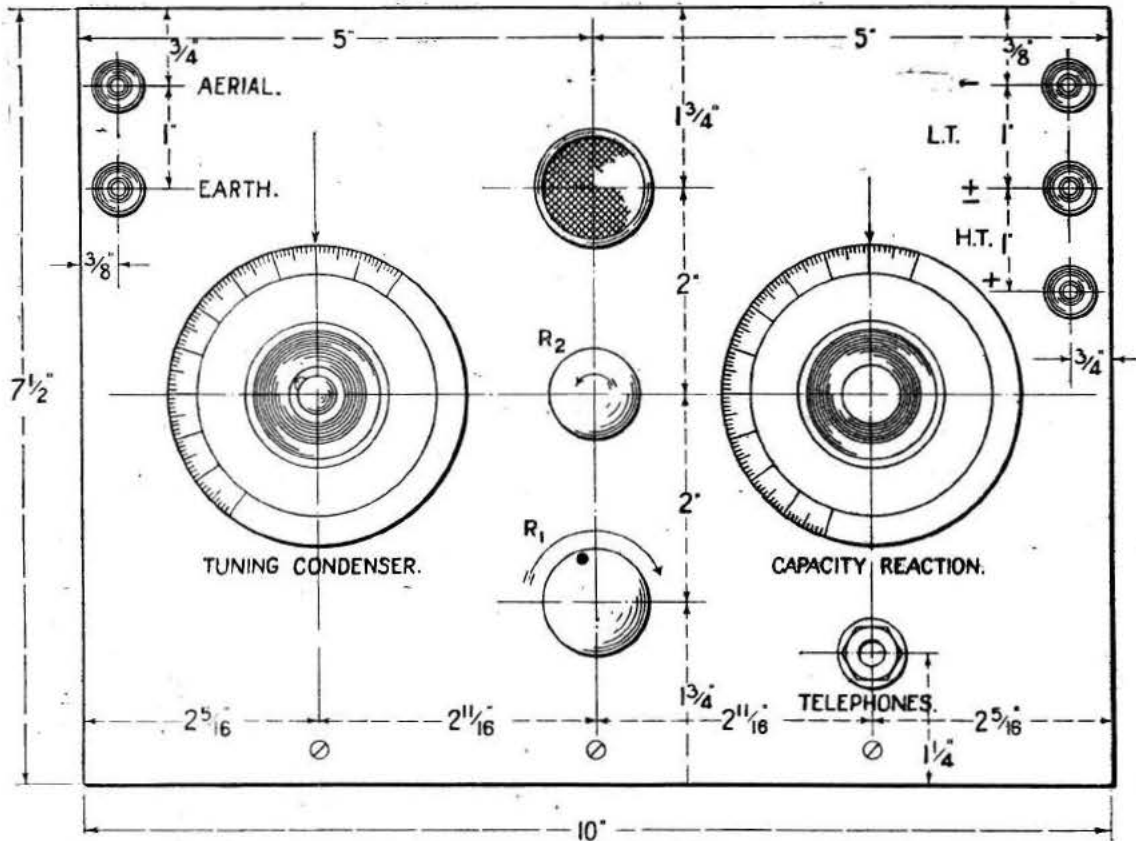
Showing how the upright panel is drilled. All necessary dimensions are given.
